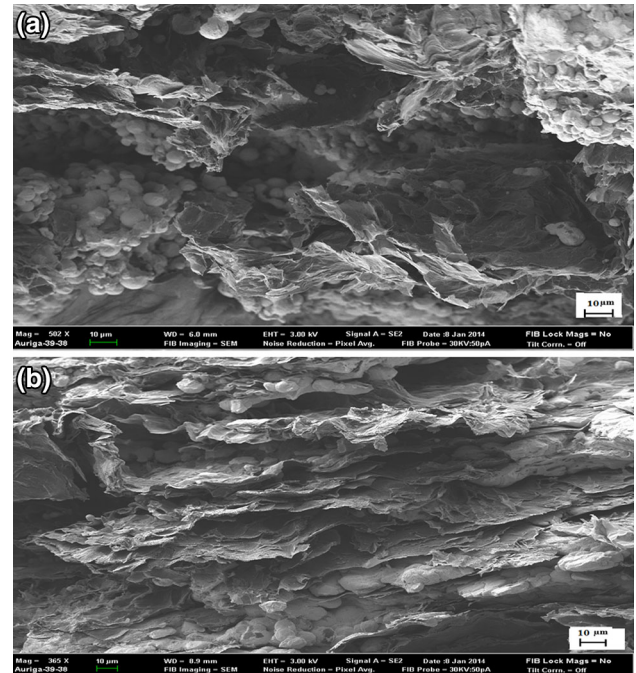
SEM images for type B solder composite edge fracture surface view. (a) High magnification ($\times 502$). (b) Low magnification ($\times 365$). The specimen contained 56 vol.% solder.
